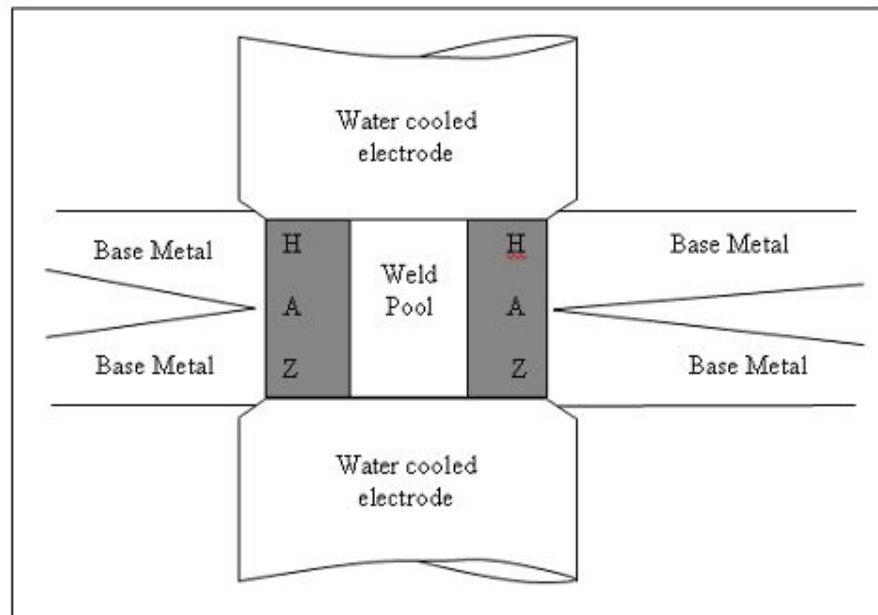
Schematic cross section of spot welded sheet metal
